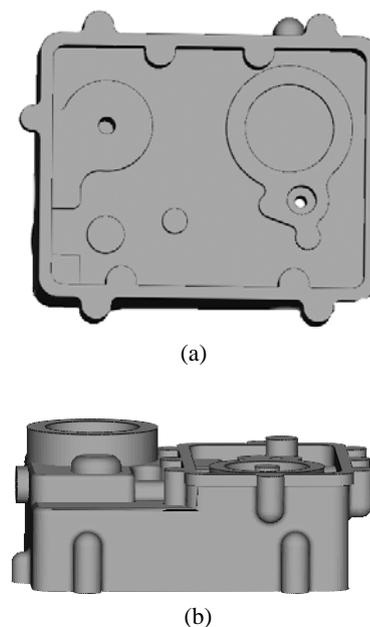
Part with sudden increasing area outside the sintered area. (a) Bottom view; (b) Front view
